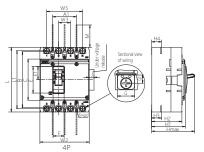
NXM-63~250 front-panel wiring overall and installation dimension
